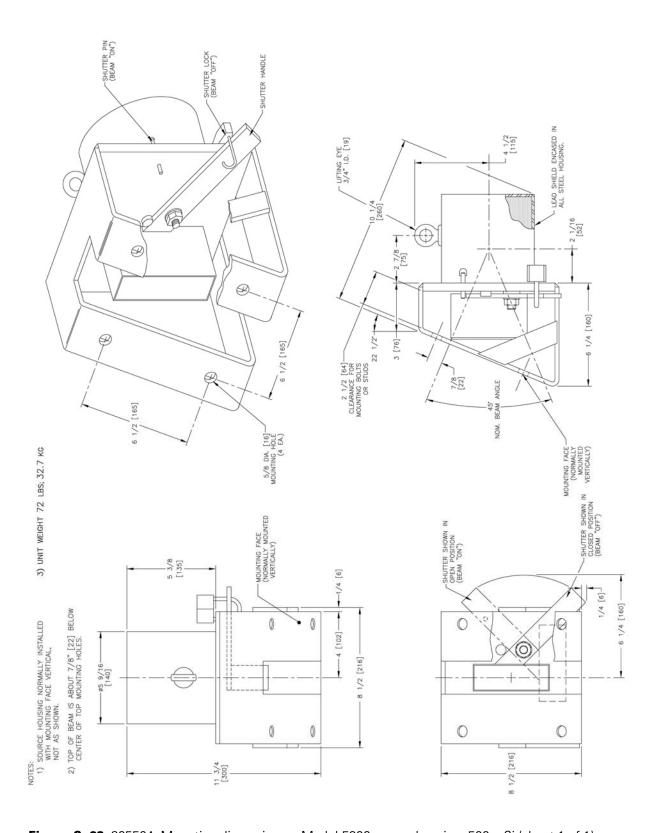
865504: Mounting dimensions - Model 5206 source housing, 500 mCi (sheet 1 of 1)
